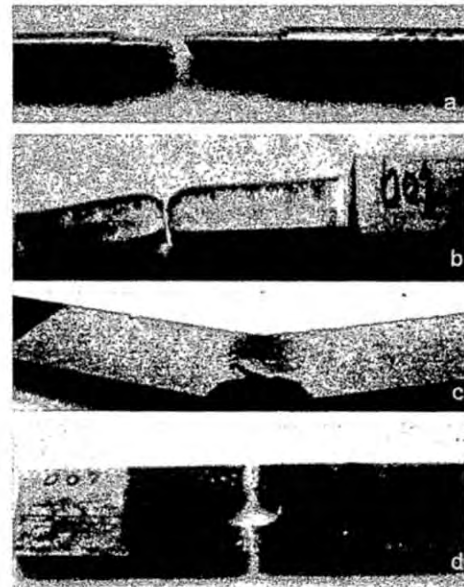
Photo of specimens after tests a - circular crosssection, b - rectangular, c - SE(B) specimen and d - specimen with a circular hole
